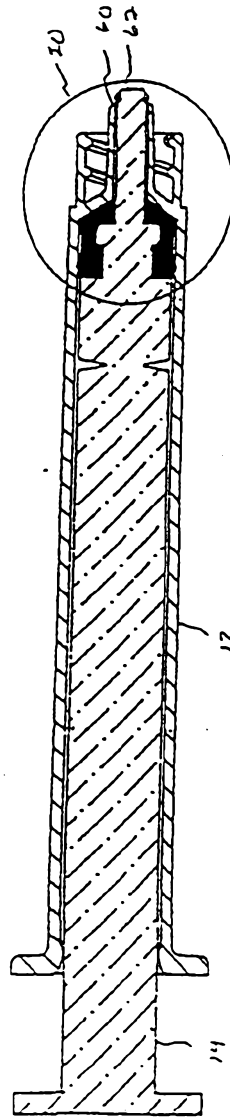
A BARREL, STOPPER & PLUNGER CROSS-SECTION
